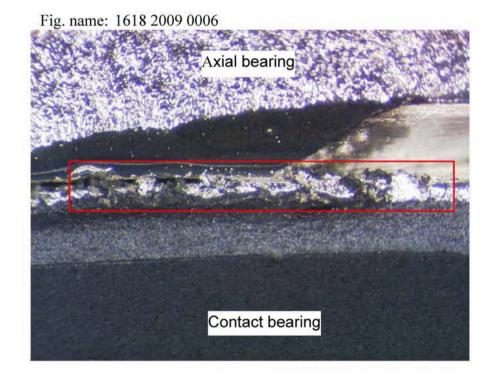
Pump no. 1 Space between compensating disk, contact bearing flange
